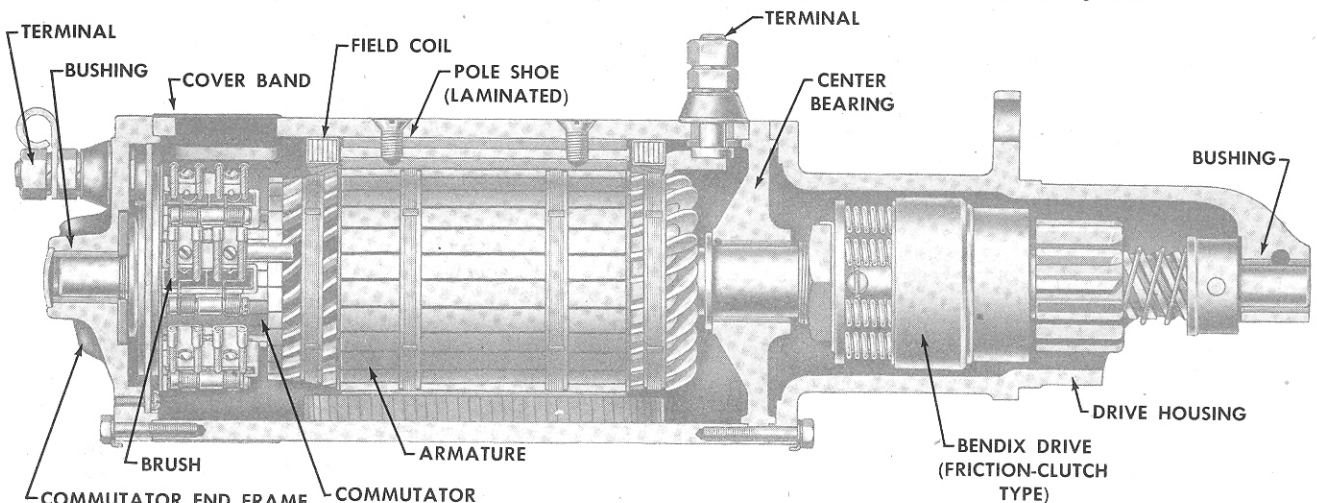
Heavy-duty cranking motor using a friction-clutch type Bendix drive.
